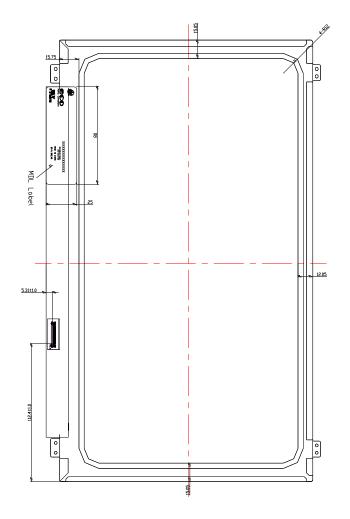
TFT-LCD Module Outline Dimension (Front View)
